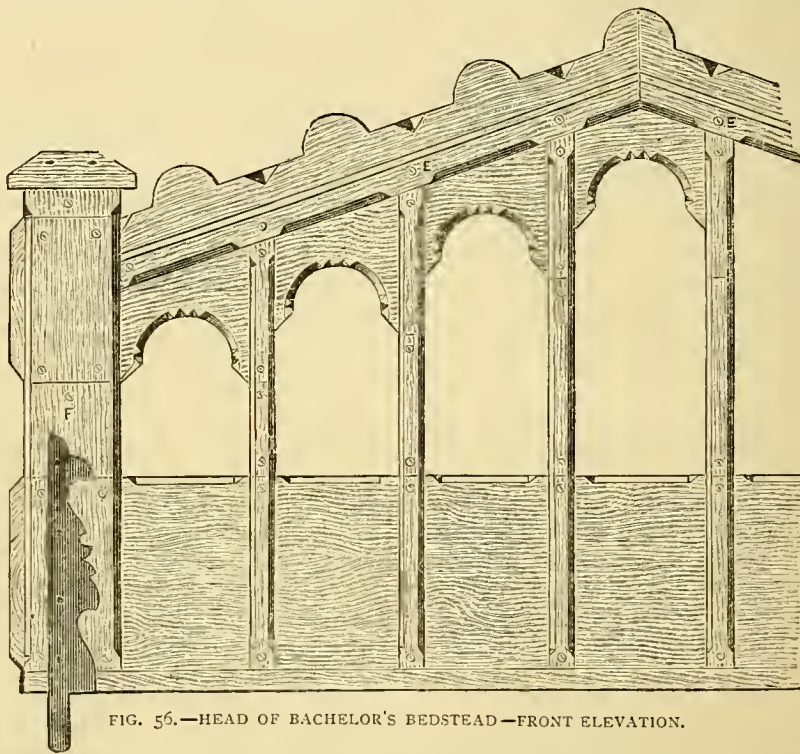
HEAD OF BACHELOR'S BEDSTEAD—FRONT ELEVATION.
